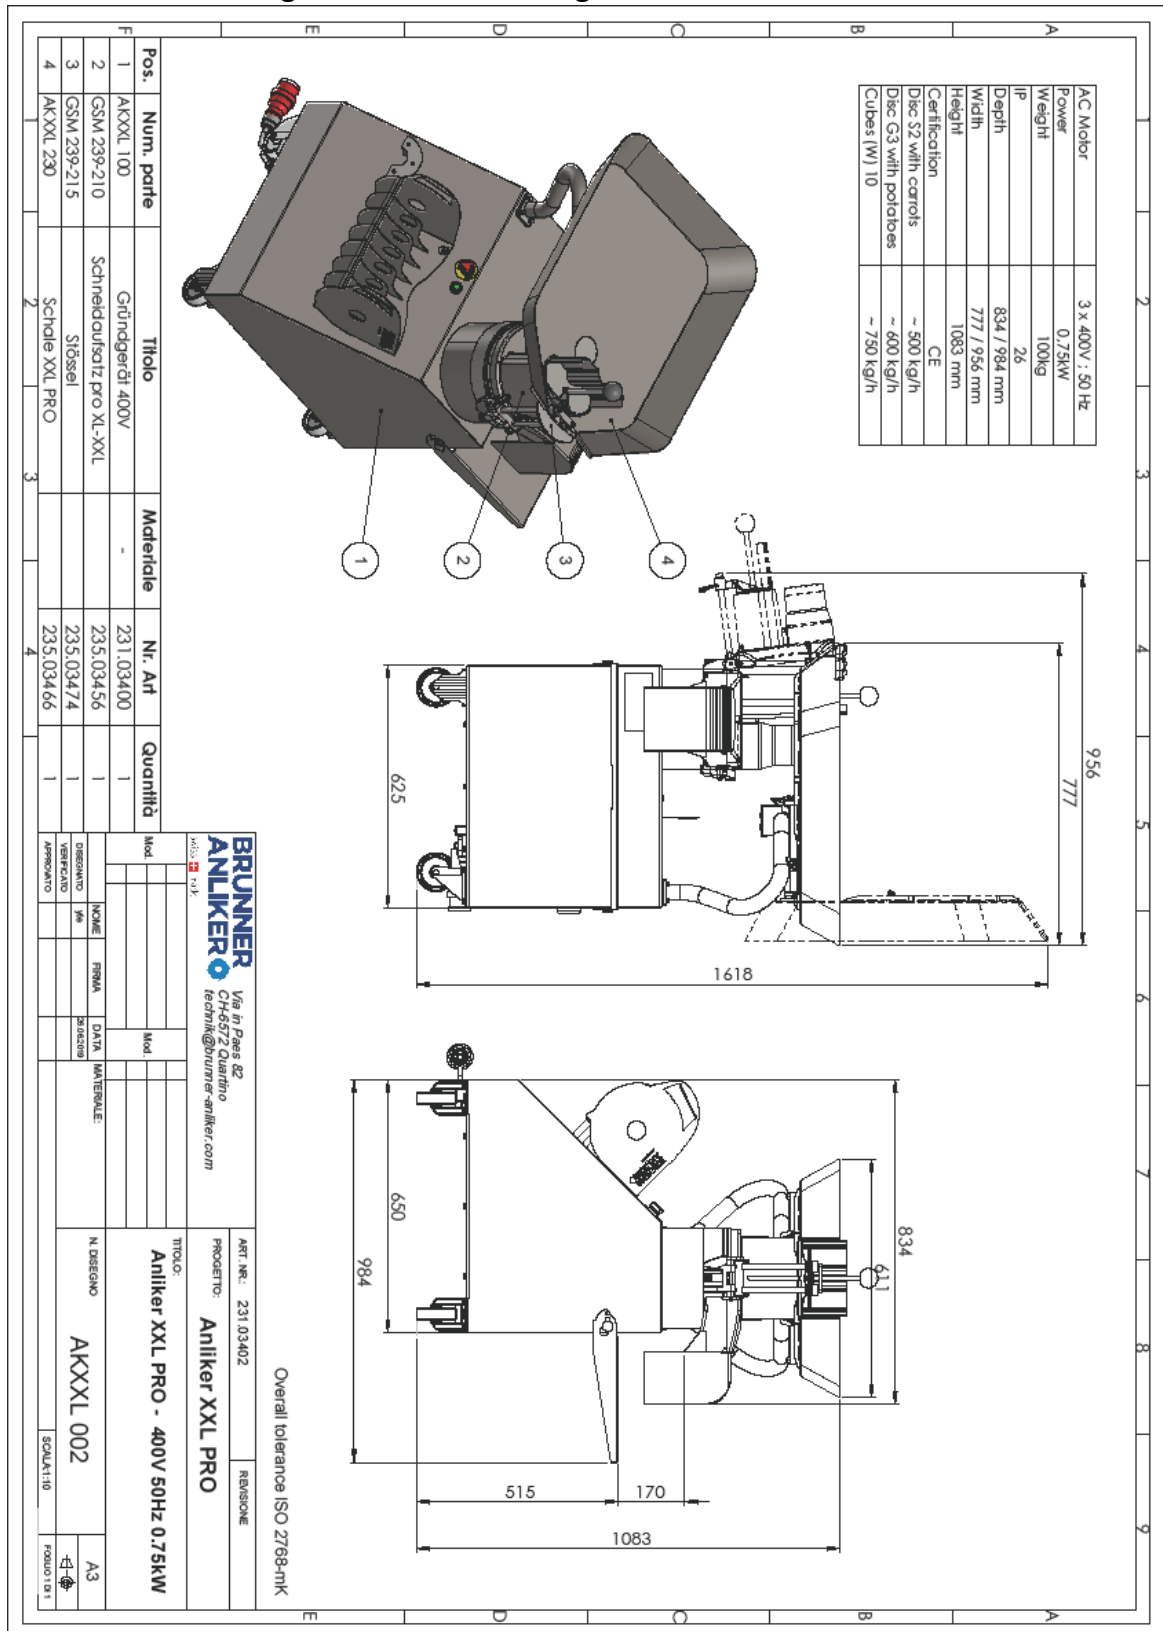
Dimensional drawing ANLIKER XXL PRO
